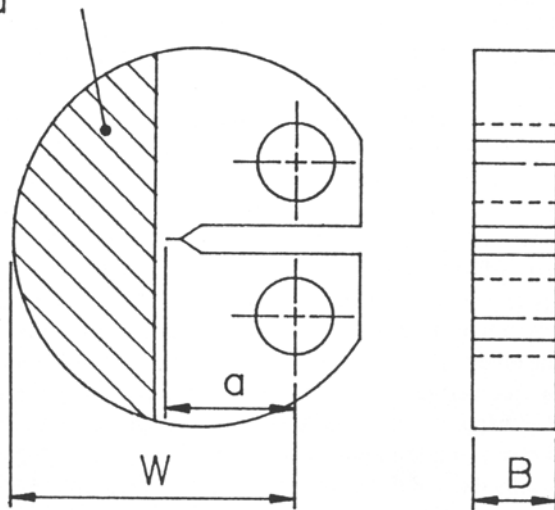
Dimensions of disk-shaped compact tension specimen. $w = 30$ mm, $B = 5$ mm, and $a = 13.5$ to 16.5 mm
